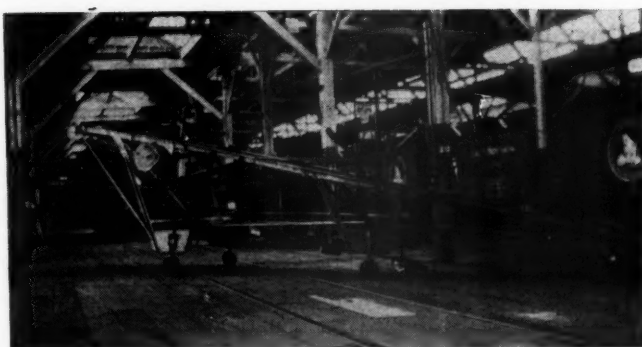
(Top) Conveyor used in disposing of truck scrap: Fig. 11—One of the self-clearing scrap-wood trailers used in the stripping yard: Fig. 12—Nut removing machine in operation—This machine was found to be faster than burning off column and oil-box bolts with a cutting torch: Fig. 13—Car spotting hoist mounted at one end of the shop—Approximately 3,000 ft. of cable is attached to each end of these machines: Fig. 14—Standard ladders and benches used in rebuilding refrigerator cars—The ladders are built of  $\frac{3}{4}$ -in. and  $\frac{1}{2}$ -in. pipe, and the benches of  $\frac{3}{8}$ -in. pipe and wooden platform—The benches are used inside the cars for ceiling work
